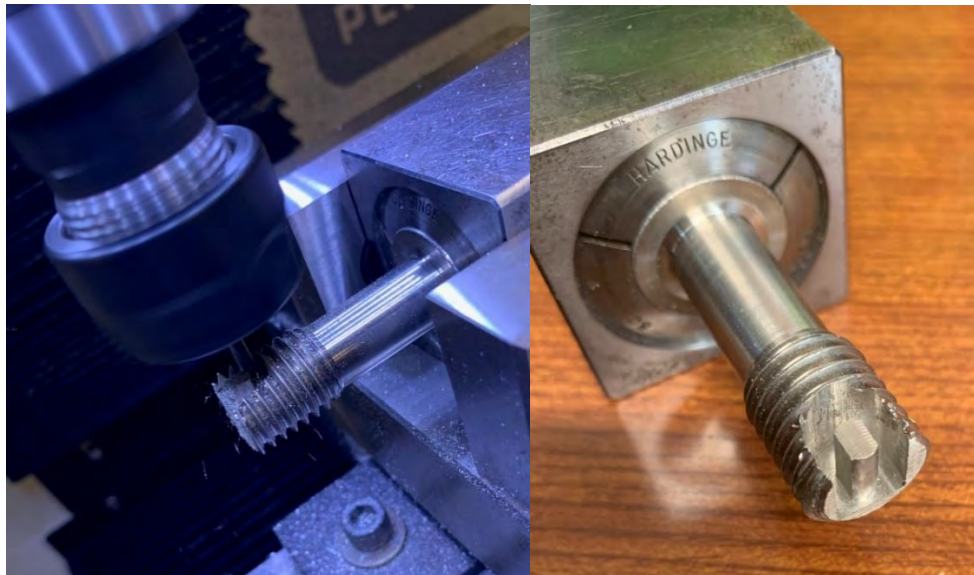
Machining of 4-point bend samples from unirradiated practice bolt
